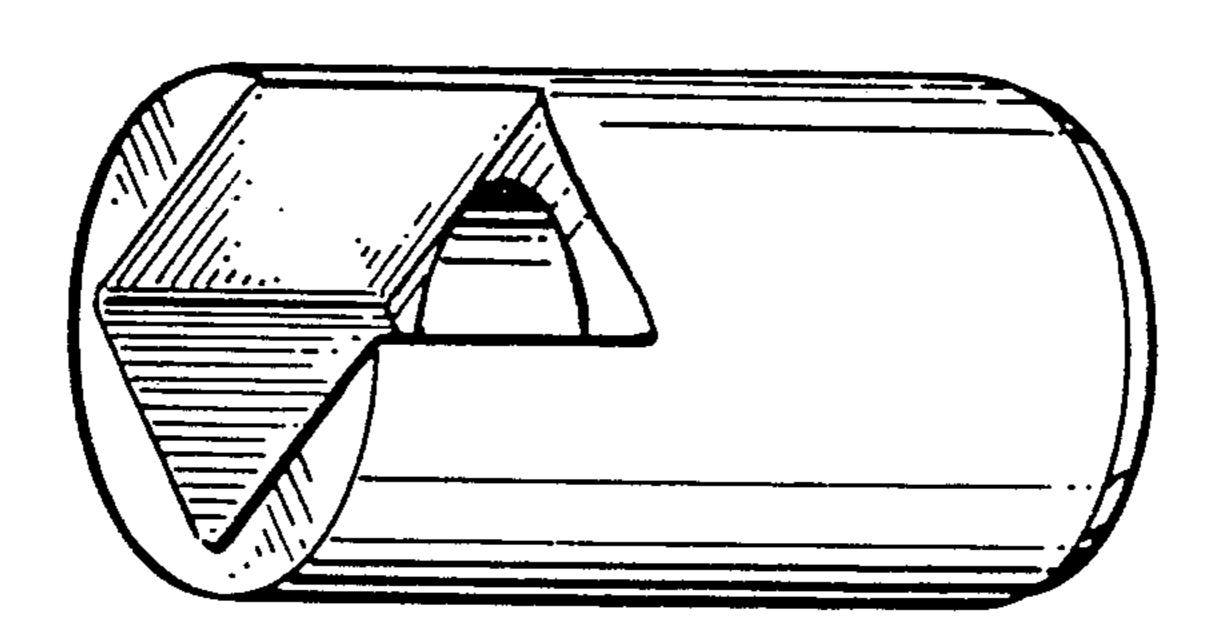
is a perspective view of a thrust bearing for wheel struts of model airplanes showing our new design;
